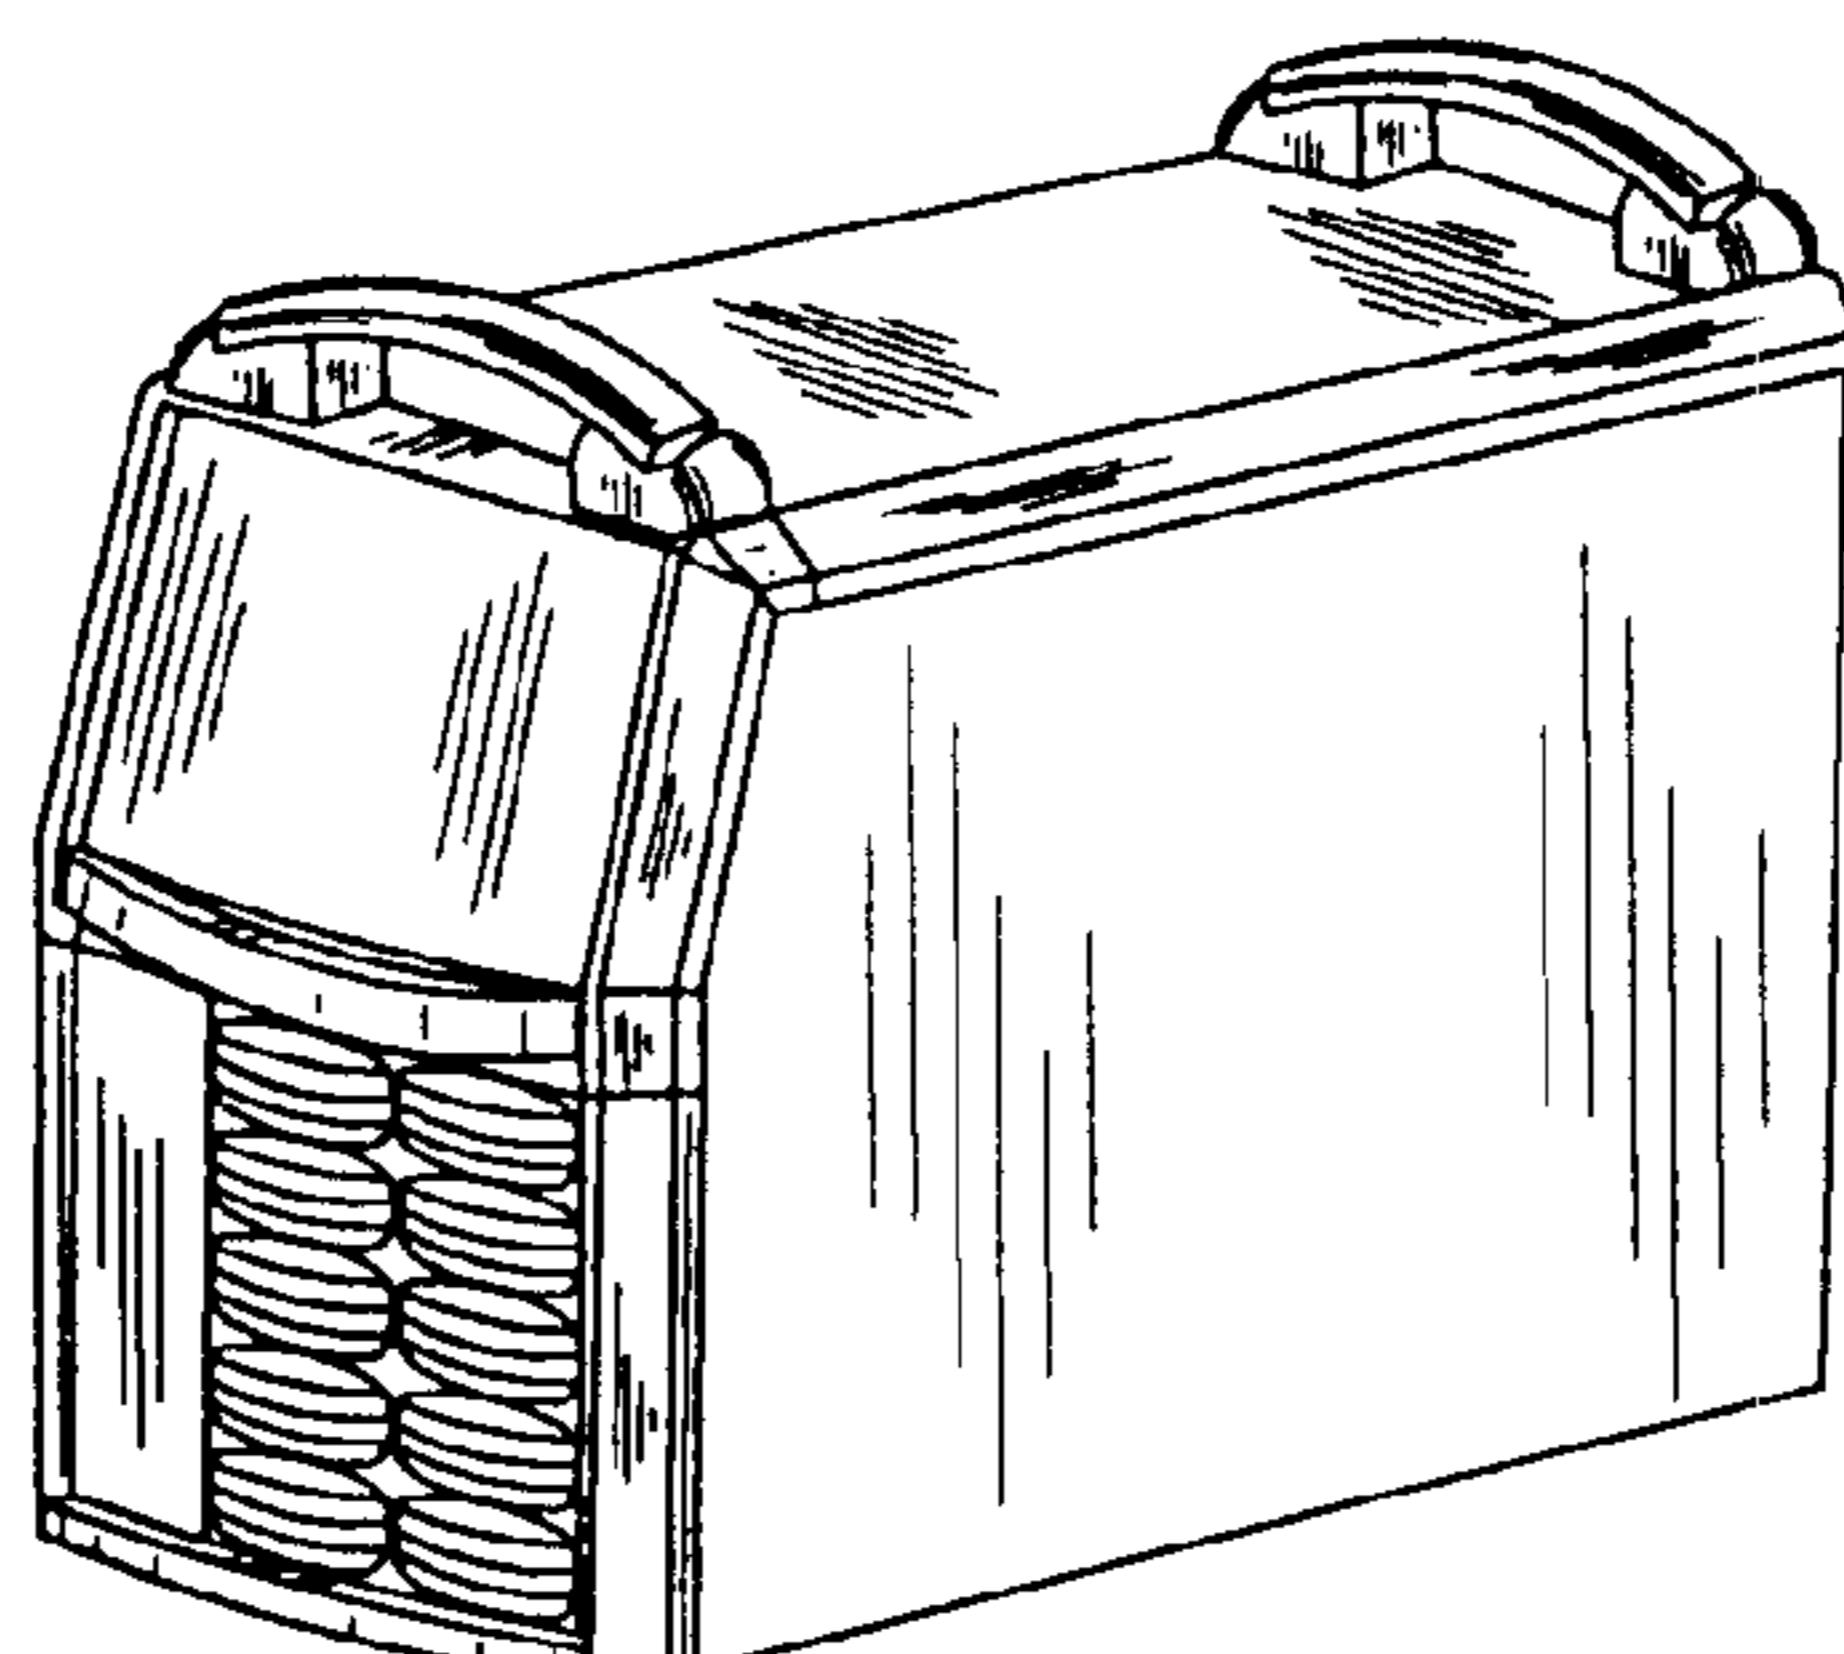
is a back perspective view of the variation of the fourth embodiment of a welding apparatus with a welding power source and a cooling module shown in FIG. 15.
